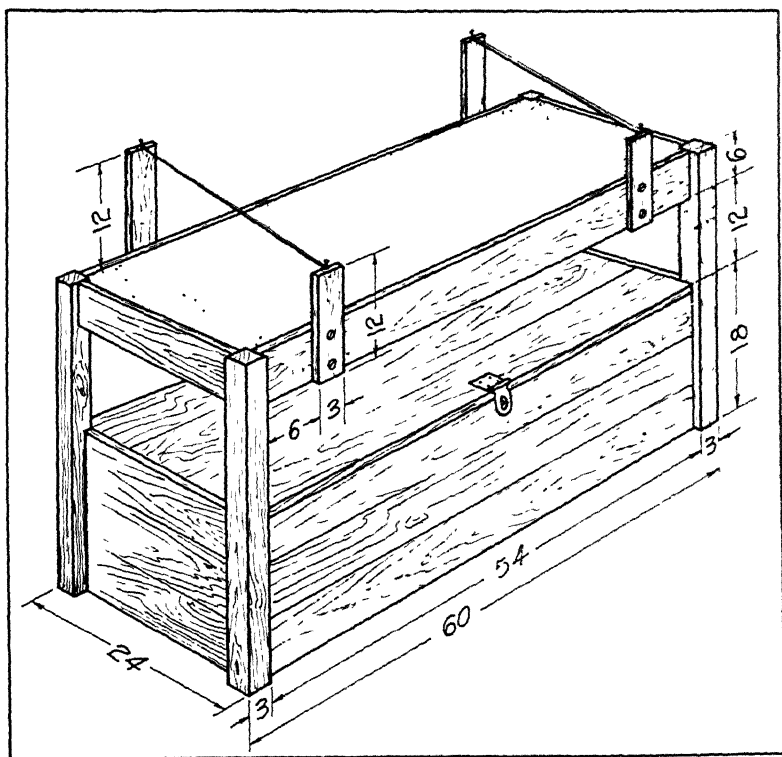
This large-sized wedging table is made of casting plaster supported by a layer of concrete and a plank. The box has a plaster bottom and is used as a storage bin.
